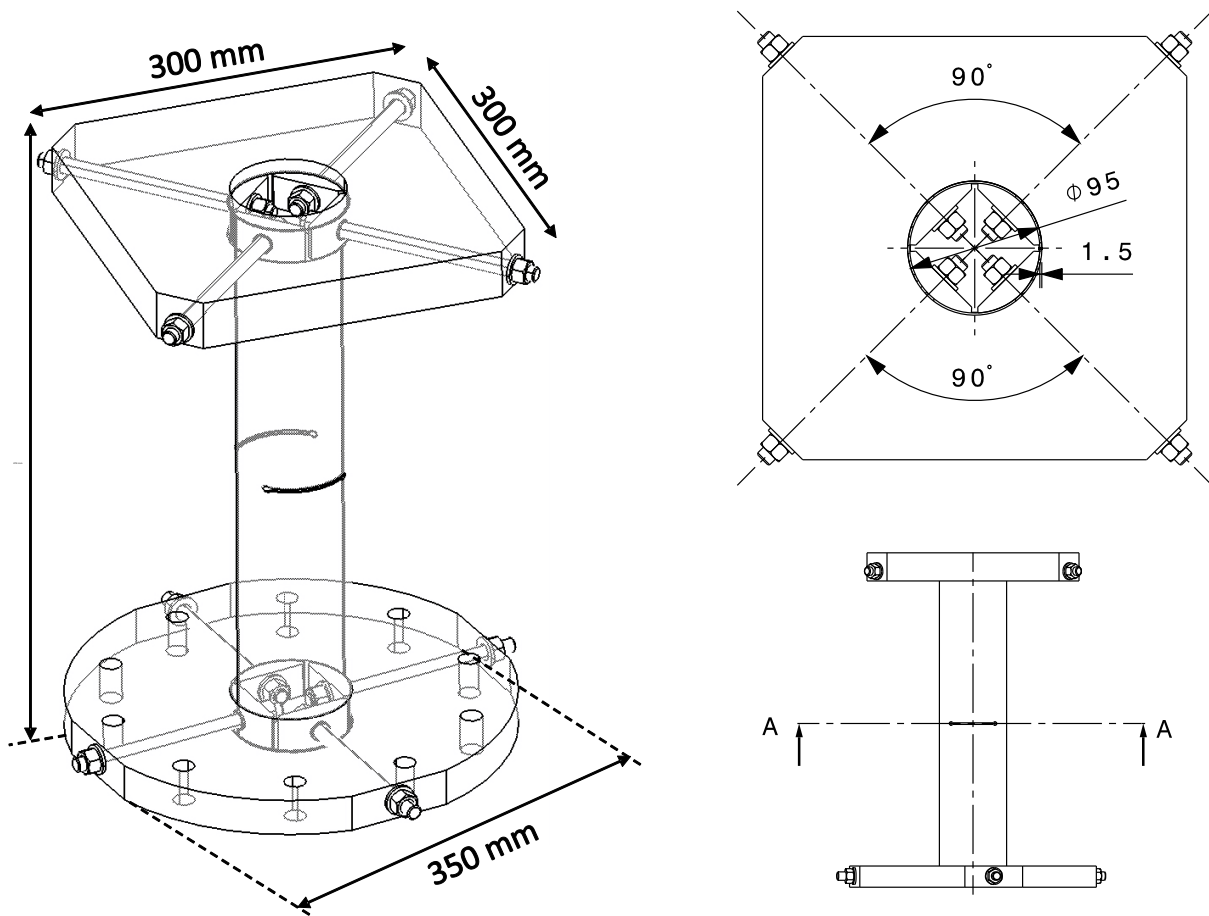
Simple pipe mock-up: Dimensions (left) and sectional view (right).
